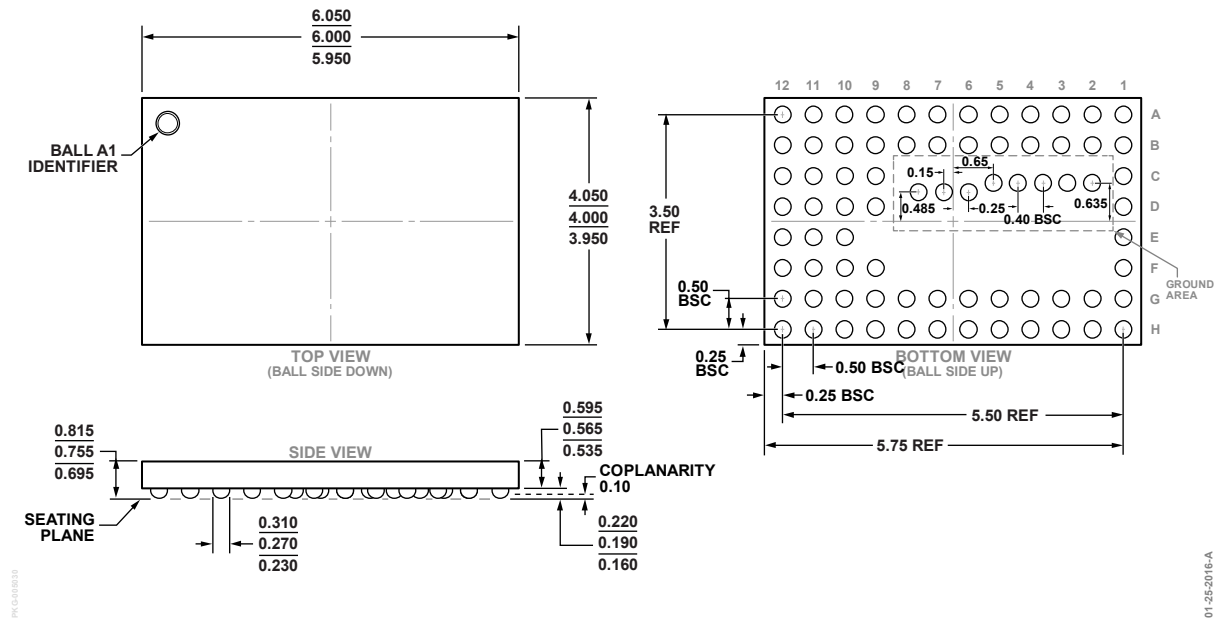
75-Ball Wafer Level Ball Grid Array [WLBGA] (BF-75-1)
